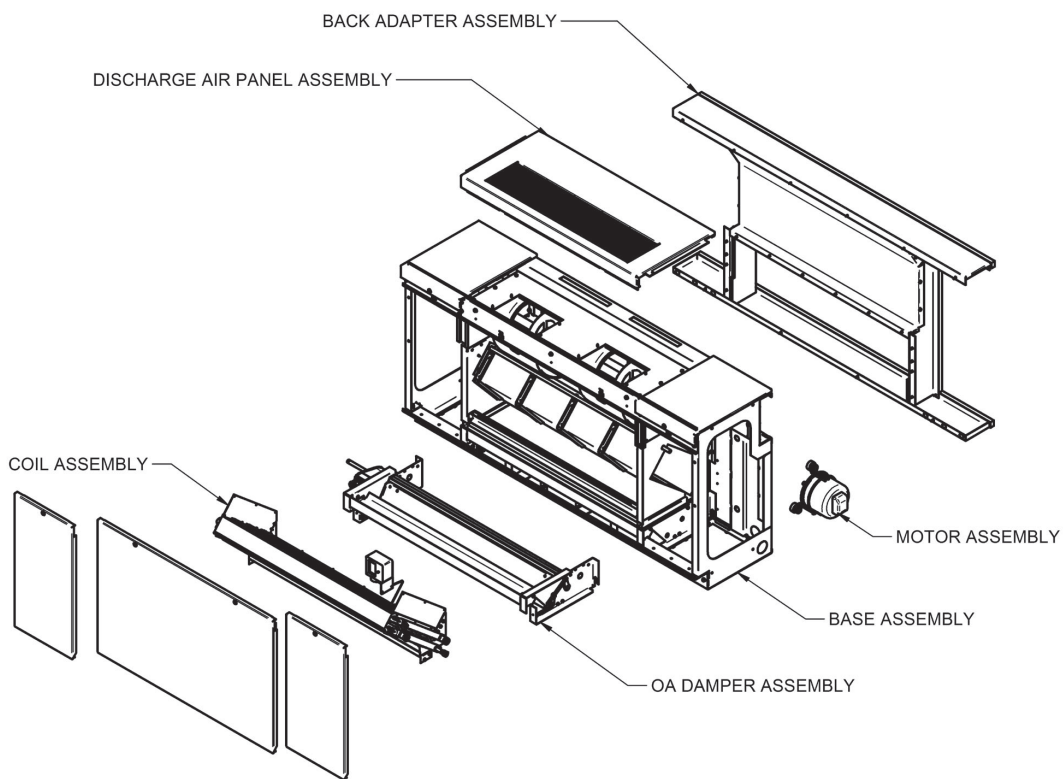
Component Layout Exploded View (Floor Mounted)
